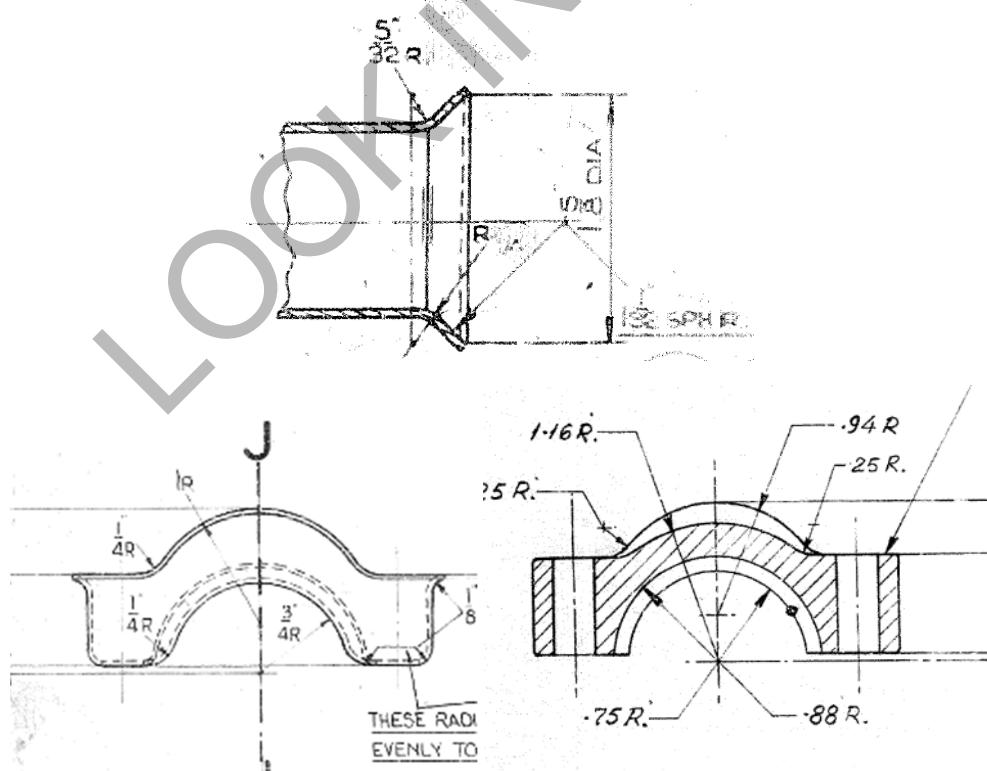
Detail at exhaust clamp flange on manifold, clamps 2A237 and AYG2018.
